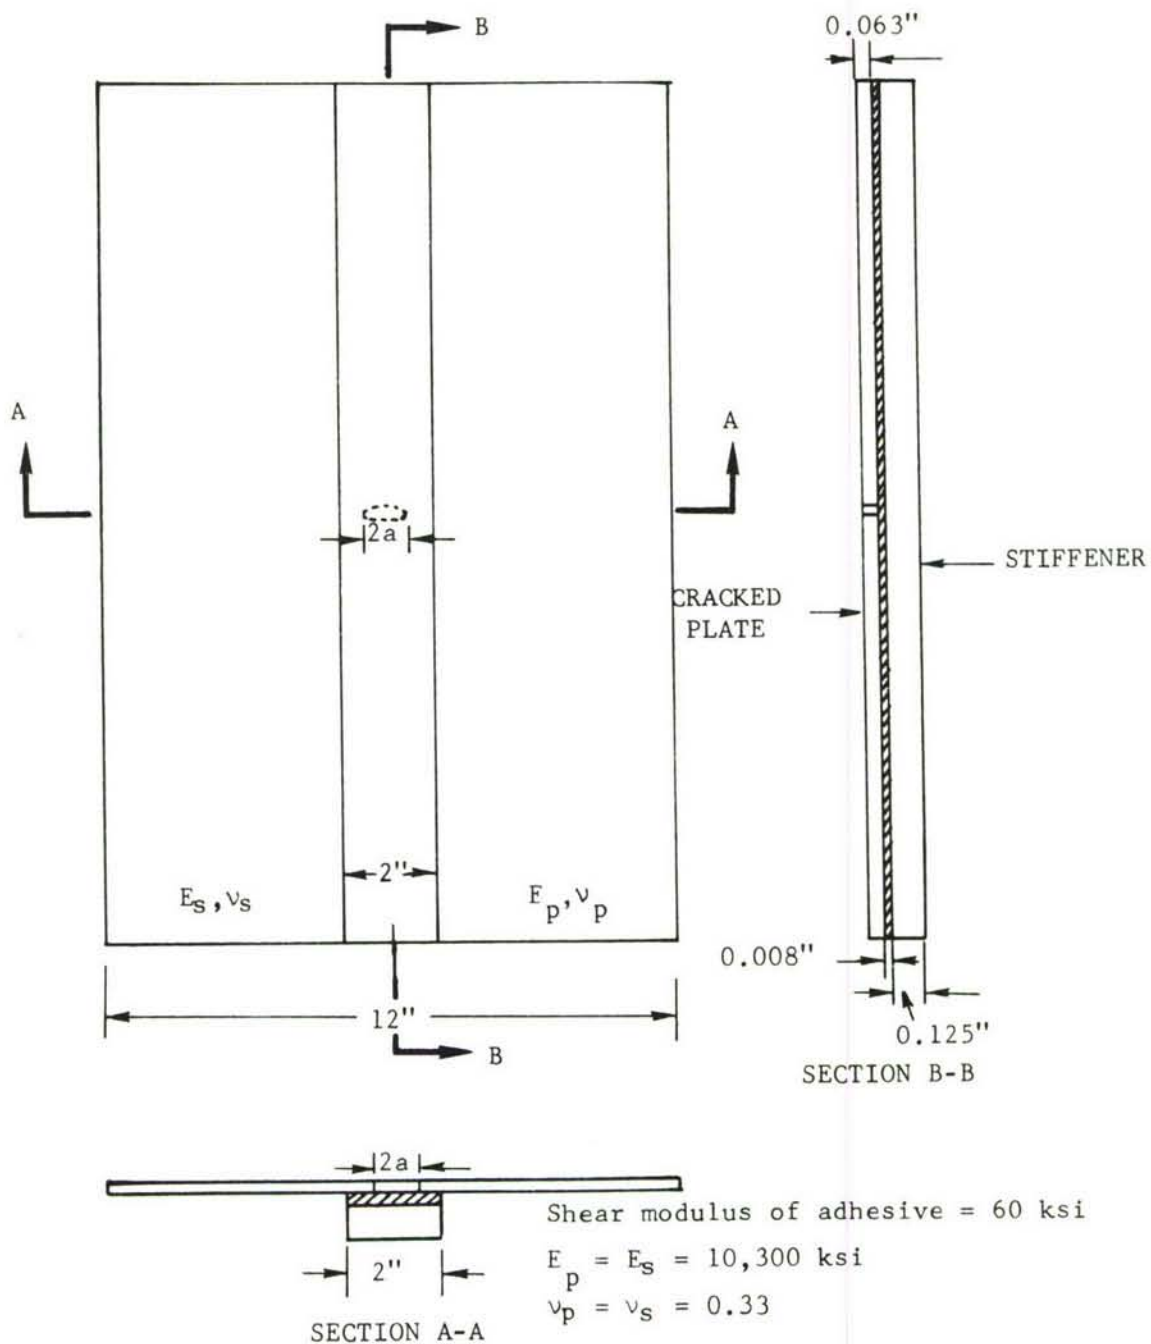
Geometry of a Cracked Plate with an Adhesively Bonded Stringer (no debonding)
